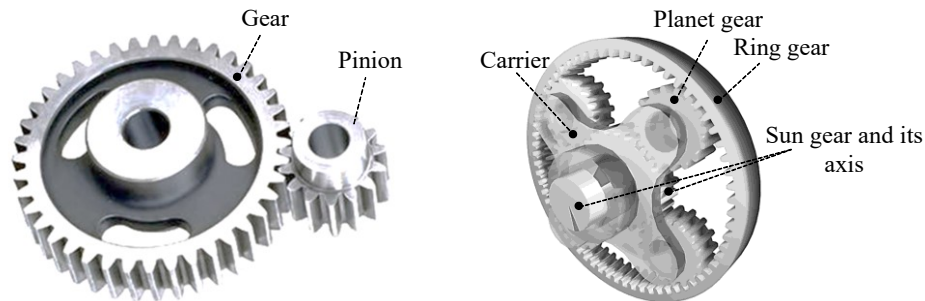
Structure of a fixed-axis gear set (a) and a planetary gear set (b)
